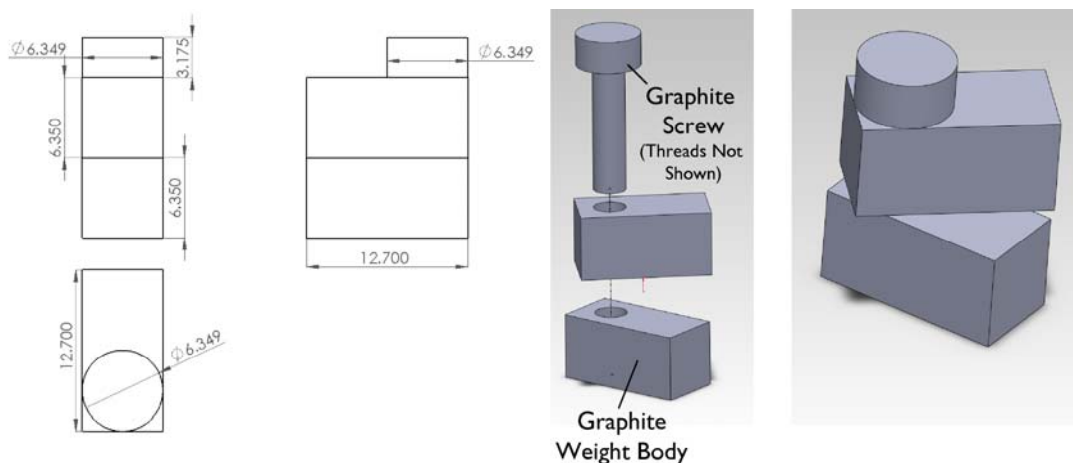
(*Left*) Dimensions (in mm) for two-piece graphite weight assemblies; (*middle*) exploded view of weight assembly; (*right*) assembled weight assembly.
